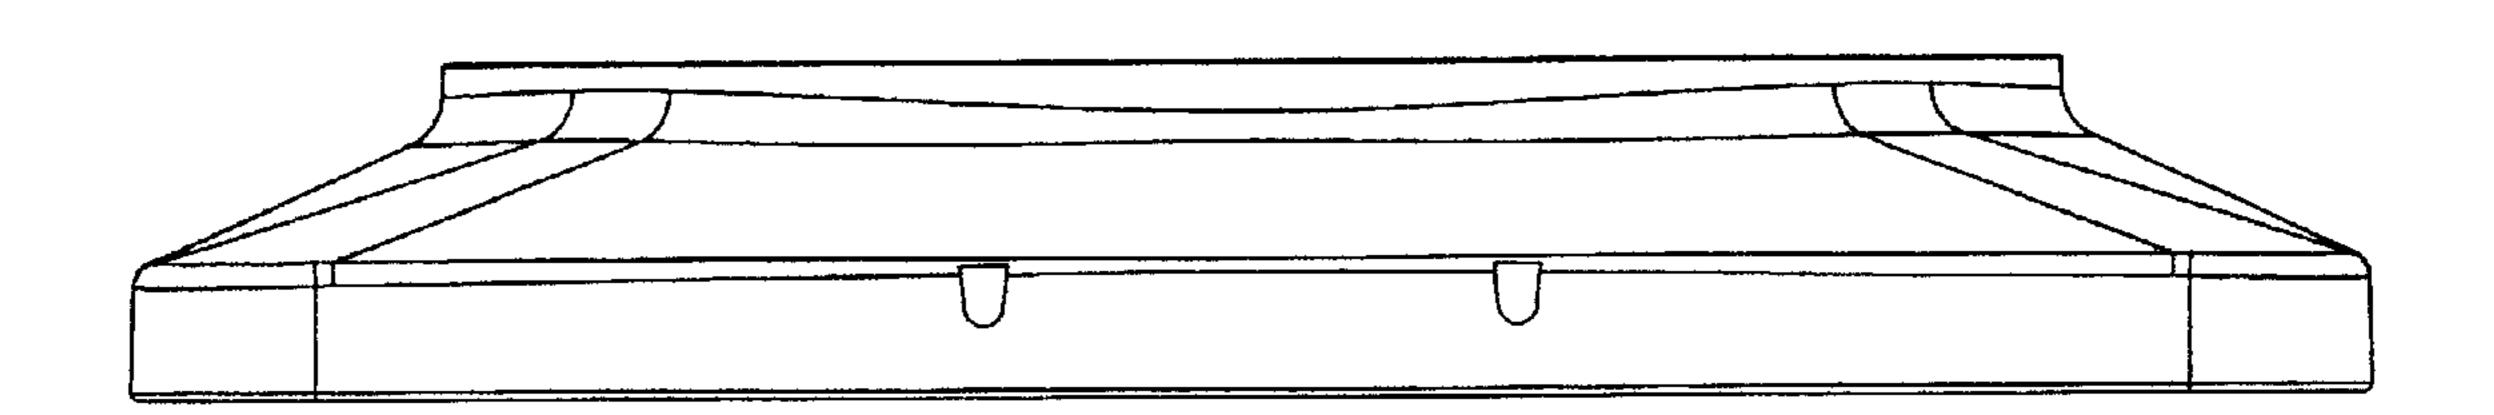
is a bottom view of the combined fan assembly and shroud portion shown separately for clarity of illustration.
